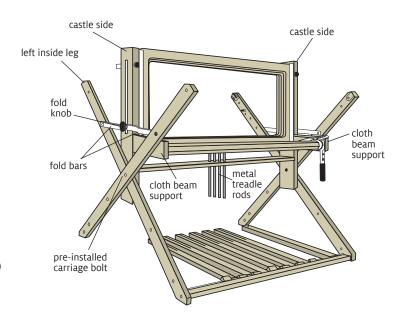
A - ATTACH CASTLE ASSEMBLY
